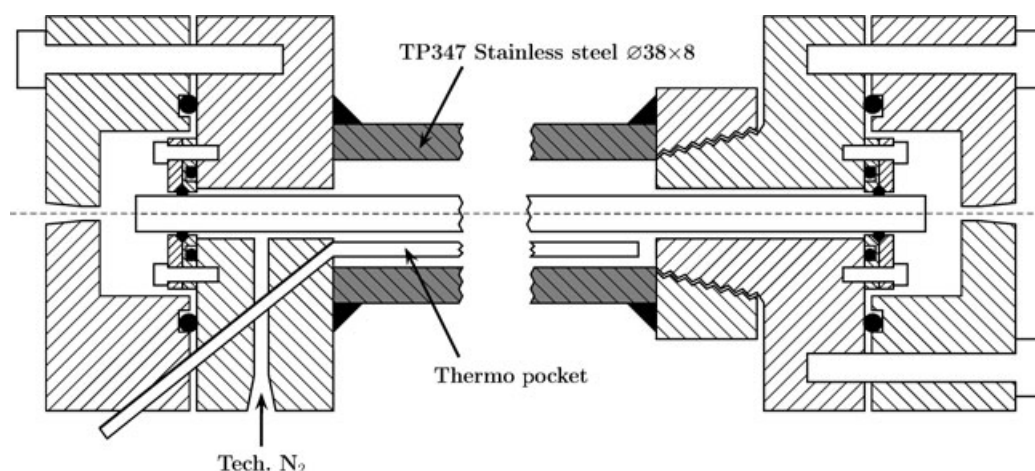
Principle design of the two AISI 316 stainless steel flanges (light hatched parts) with the two small AISI 316 steel plates and the tubular quartz reactor mounted inside. Positions of bolts are indicated by white silhouettes. Gray hatched parts illustrate the TP347 stainless steel pressure shell. Black circles are Viton O-rings, and black triangles indicate welded connections.
